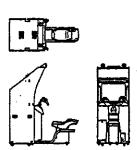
2 c Refer to this Fig. (Scale:1/100) for the layout of the place of installation.
